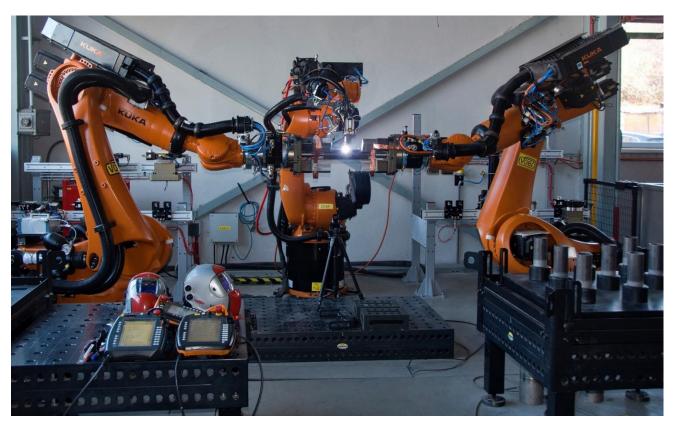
Testing of robotic manipulation and robotic welding in prototype of the robotic system for adaptive manipulation and welding of objects.
